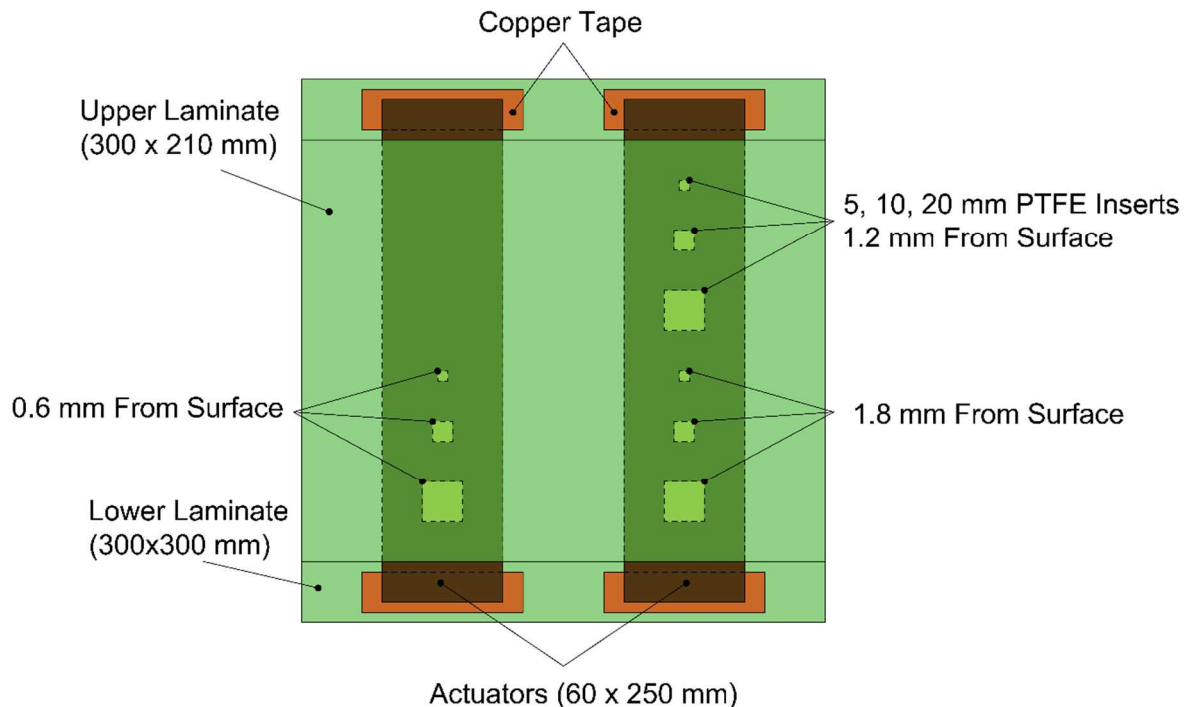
Test specimen showing two sensors and three sets of PTFE inserts.
